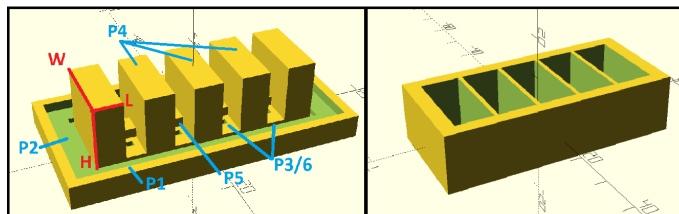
Example of 3D CAD of a mould produced the automatic design tool: Part A (left) and Part B (right).
